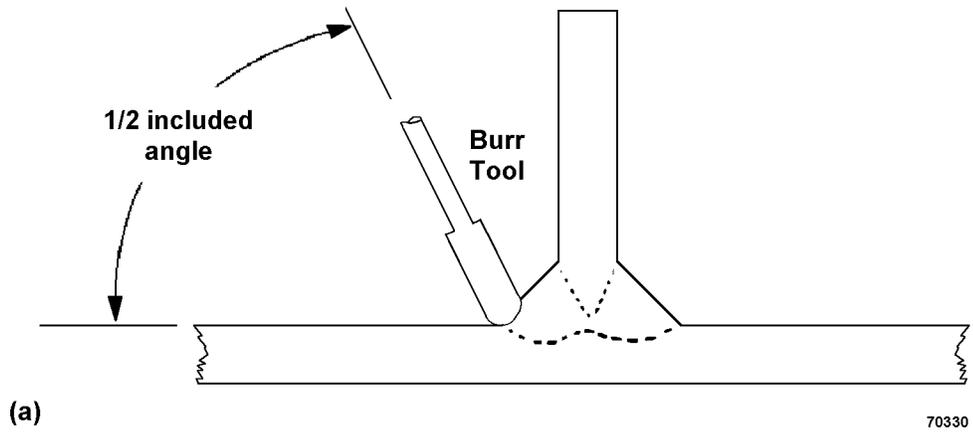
TOE GRINDING WITH A ROTARY BURR
